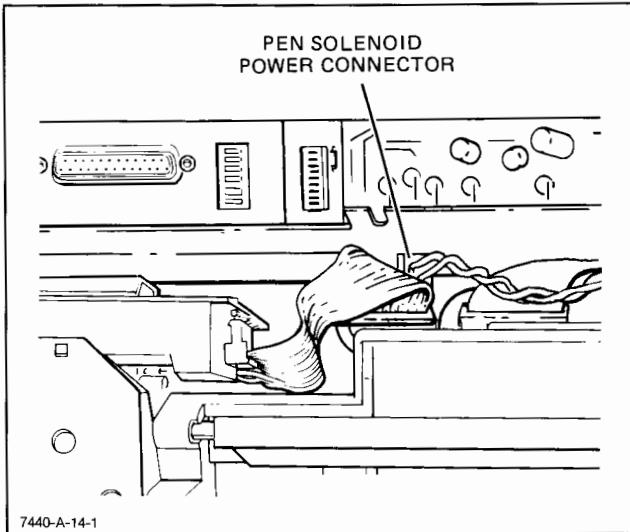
Pen Solenoid Assembly Removal, Detail A
